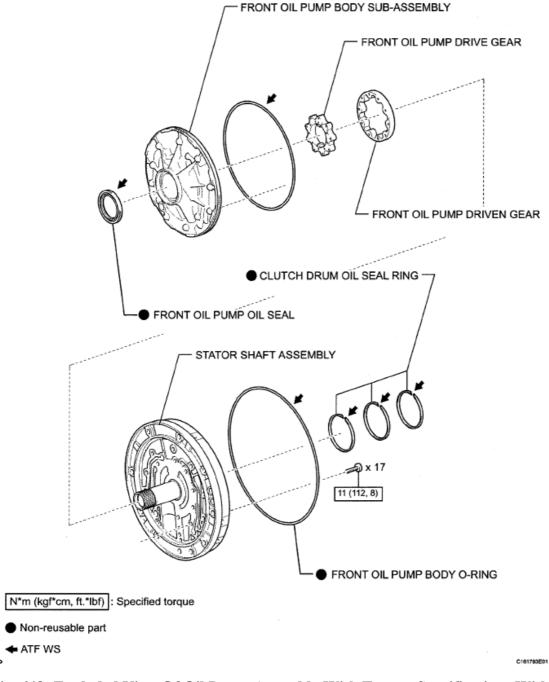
Exploded View Of Oil Pump Assembly With Torque Specifications With Torque Specification (2 Of 2)
